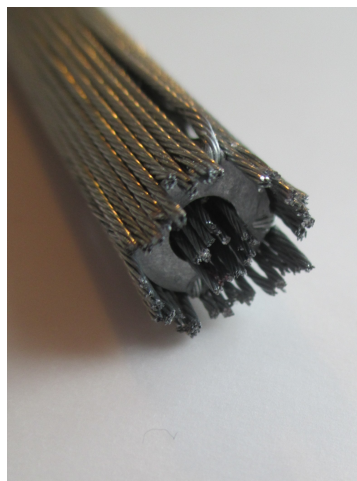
An isometric view of the flexible shaft with the tip and the four steering wire ropes included. The inner wire ropes and outer wire ropes are shown as well.
